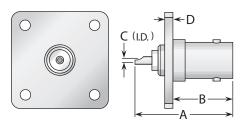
(Solder pot contact, 1" square flange, interchangeable with type N standard flange size)
